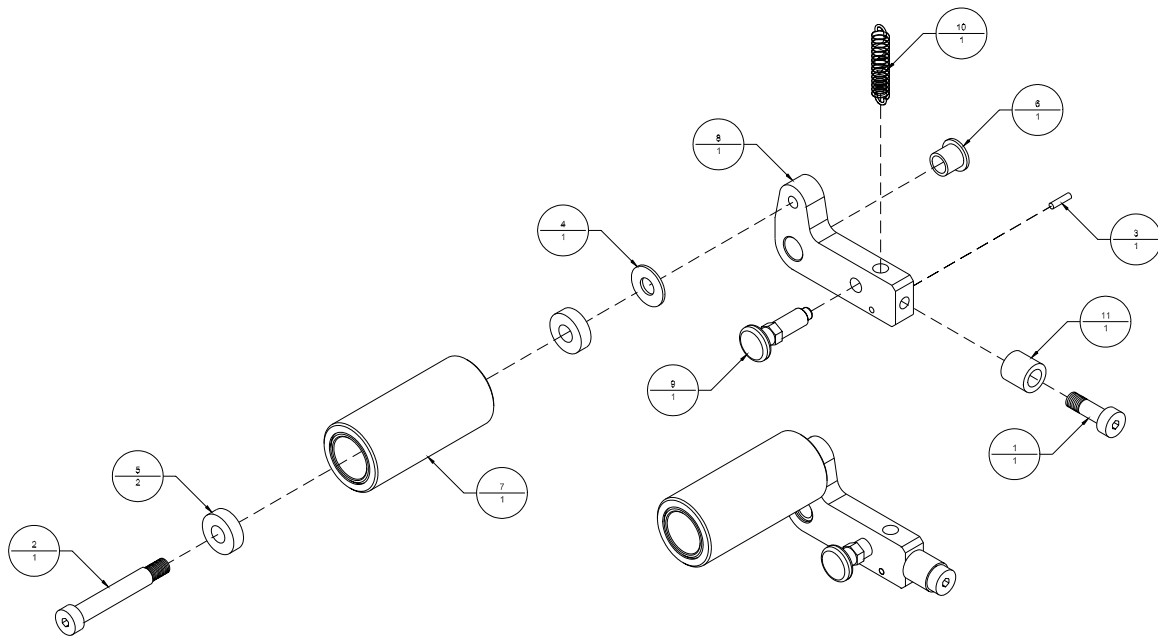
Lower Pivot Arm Assembly (9101069A)
